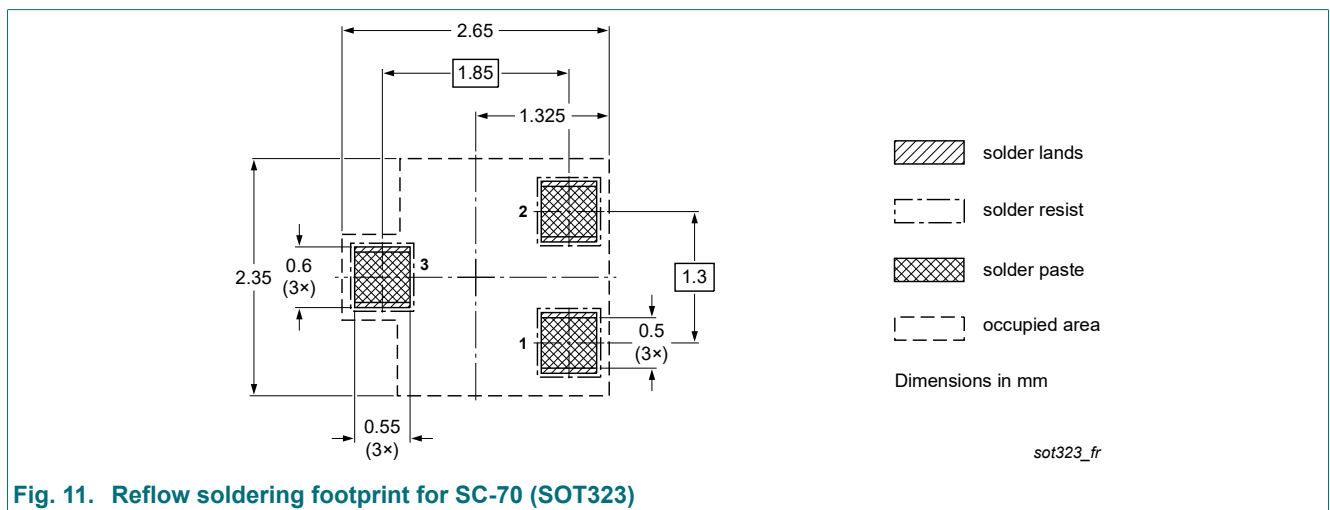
Reflow soldering footprint for SC-70 (SOT323)
